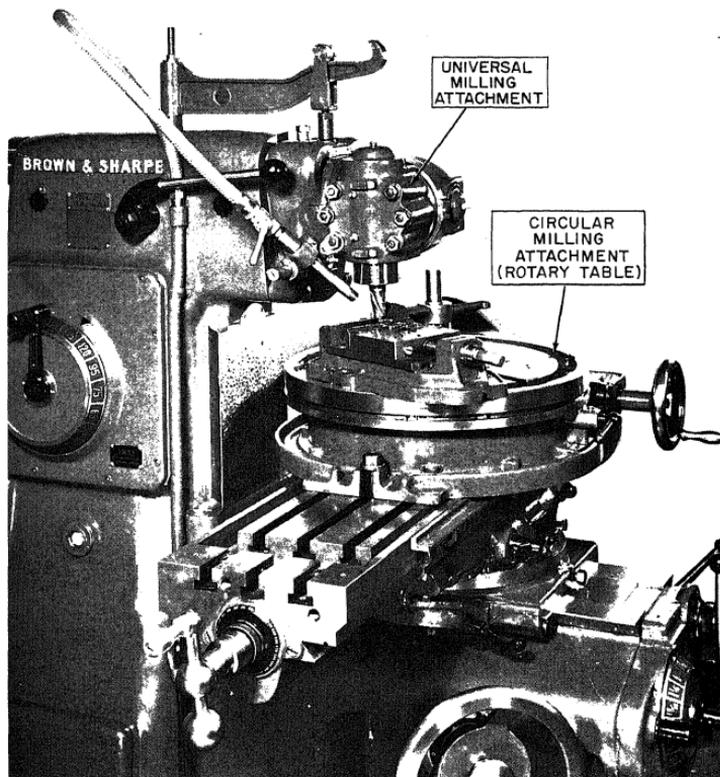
Circular milling attachments (rotary table) and universal (head) attachment.
